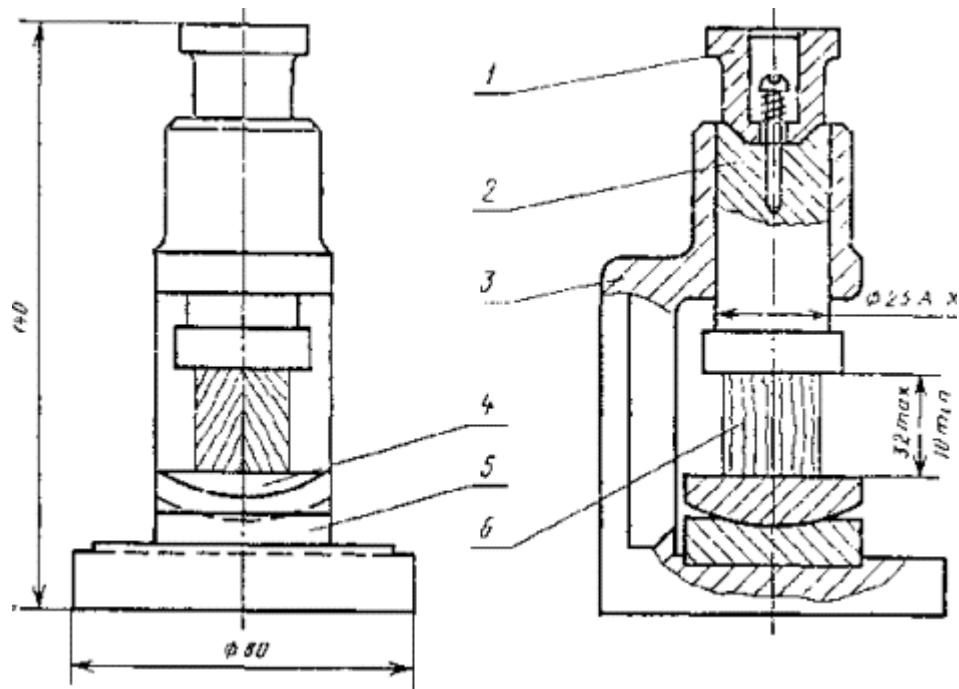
Compression test machine: 1 - cap 2 - punch 3 – body frame, 4 - pin-bearing support 5 - plate, 6 - sample
